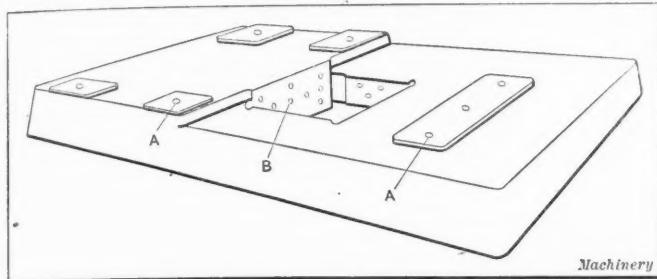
Sub-base of Machine which required Special Fixture for drilling Holes B
